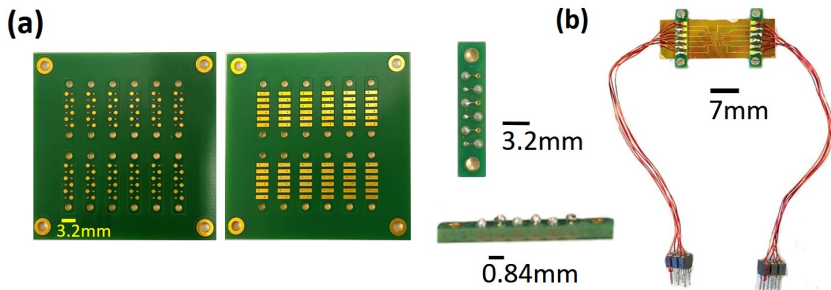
Electrical clamping. (a) PCB with printed clamps, the two square images shows the two sides of the PCB board. The round gold pads are via connected to the rectangle gold pads. Indium solder balls are soldered on top of the round gold pads of the clamp, and further the PCB is cut to get individual clamp pieces as shown in rightmost image of Fig. 4.9(a). These indium on pcb is pressed to the contact pads on the device substrate and the clamps are fixed by screwing it to the counterpart. (b) Fabricated device after electrical clamping. The pins further make the connection to electrical lines in dipstick and from there to the measurement electronics.
